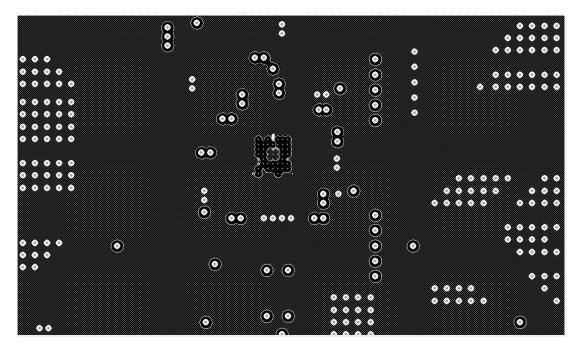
BD71815AGW Reference Board Breakout (Layer 2)
